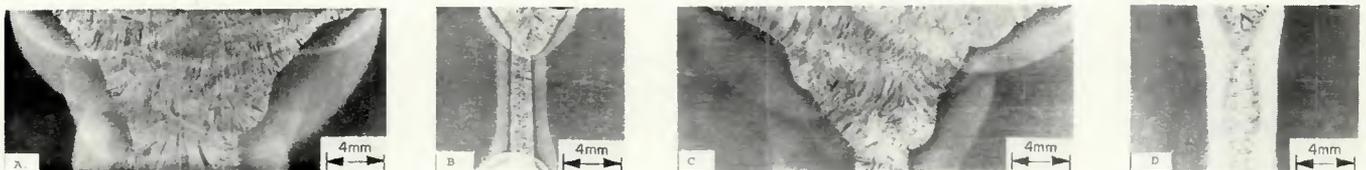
Cross-sectional views of 12.7 mm thick HY-130 weldments etched in 10% ammonium persulfate: A—SMA weld; B—EB weld; C—GMA weld; D—LB weld
